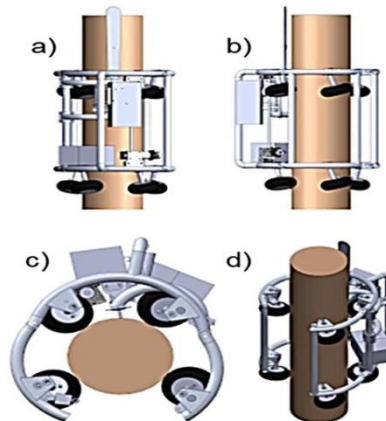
Solid Model a) Front view b) Left side view c) Top view d) Perspective view.
